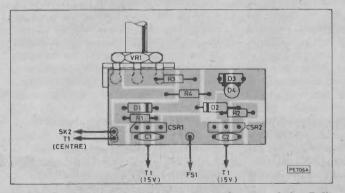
P.c.b. design and component layout of the Drill Control Unit
